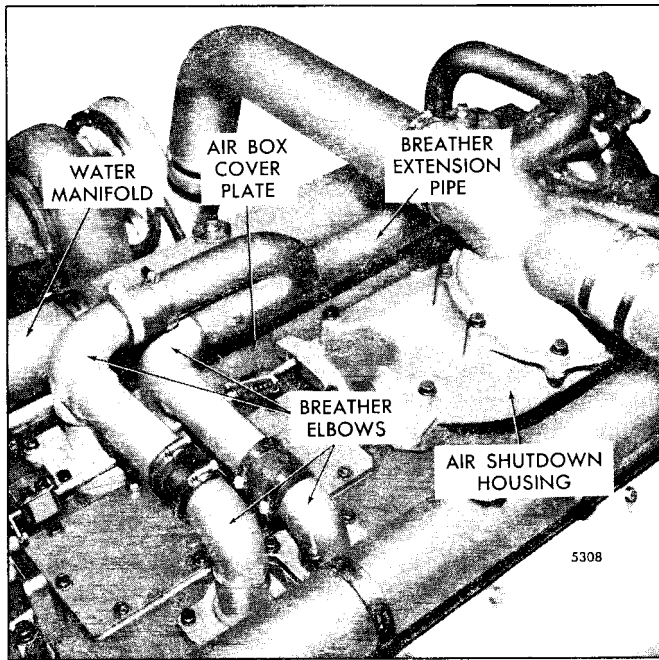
Engine Breather Mounting (Early Turbocharged Engines)
